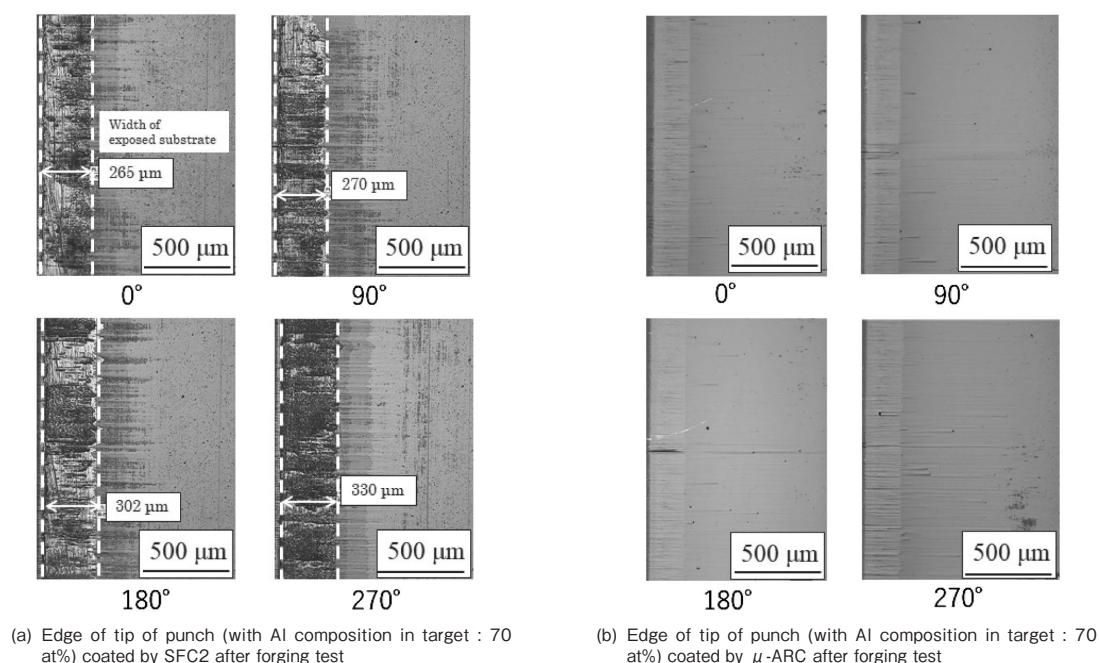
Images of edge of tip of punch with Al70Cr30 coated by μ -ARC and SFC2 after forging test
